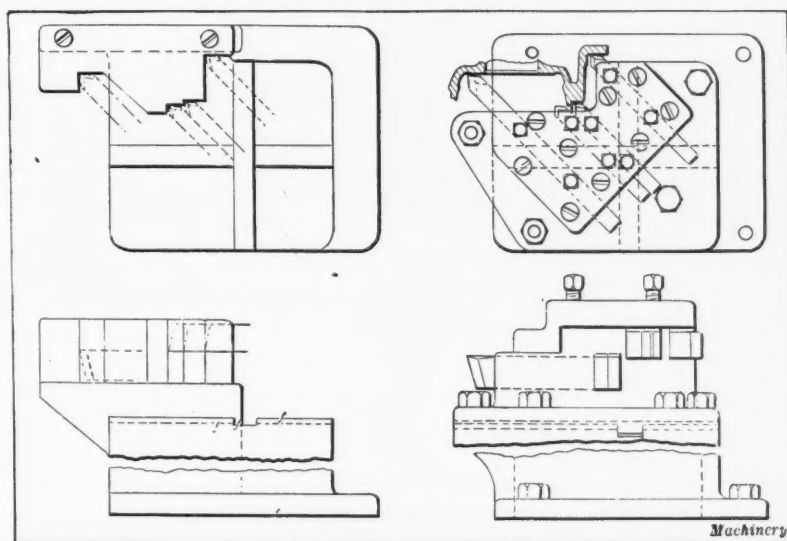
Set-up Gage used in setting Tools used on Rear Cross-slide
